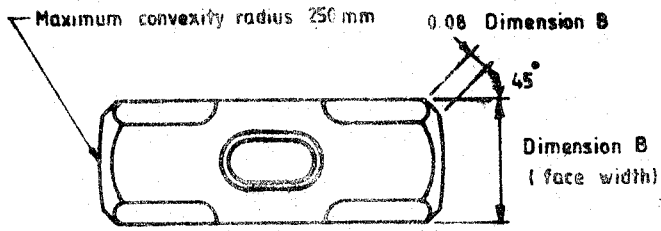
Finishing details of hammer head (Type a - 1)
